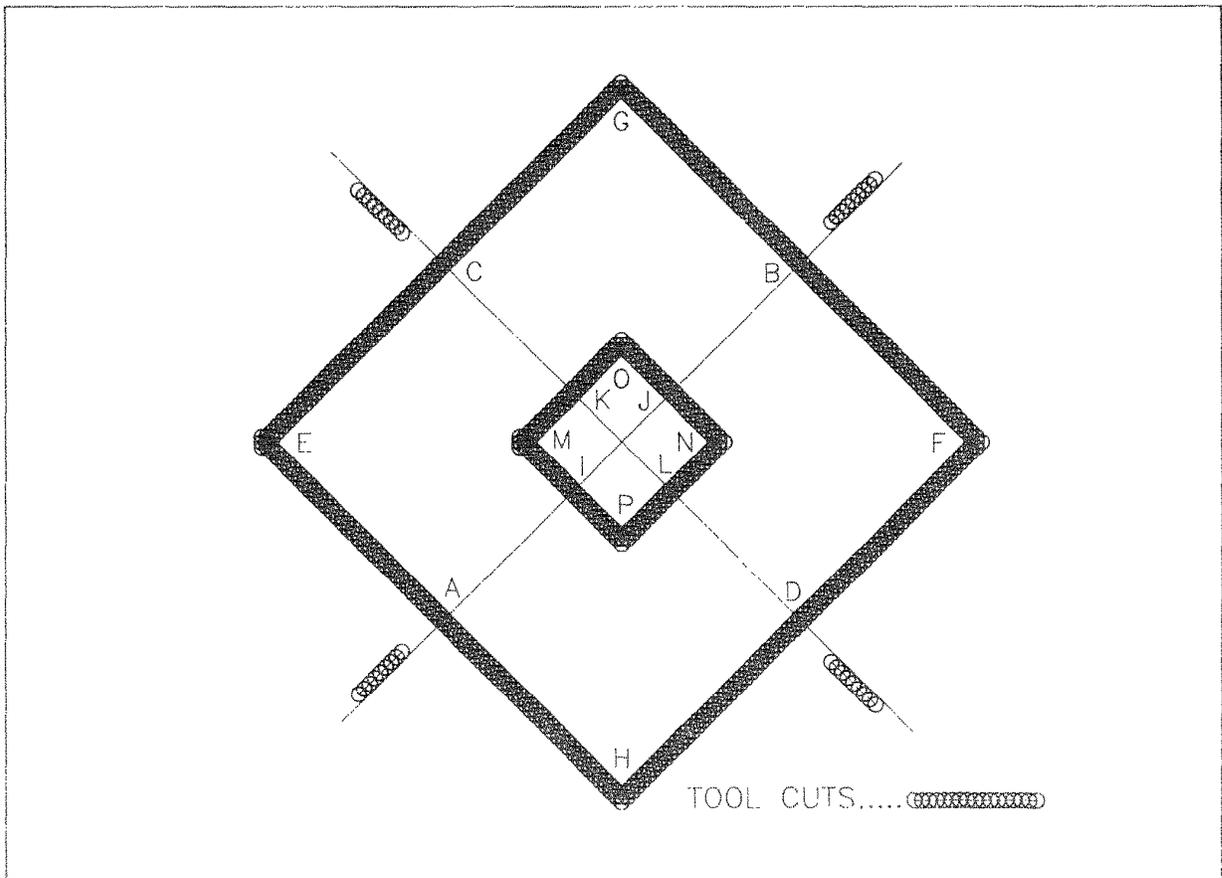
Drawing showing accuracy cuts in acrylic sheet and measurement points for both the 2-inch and 8-inch diamonds.
